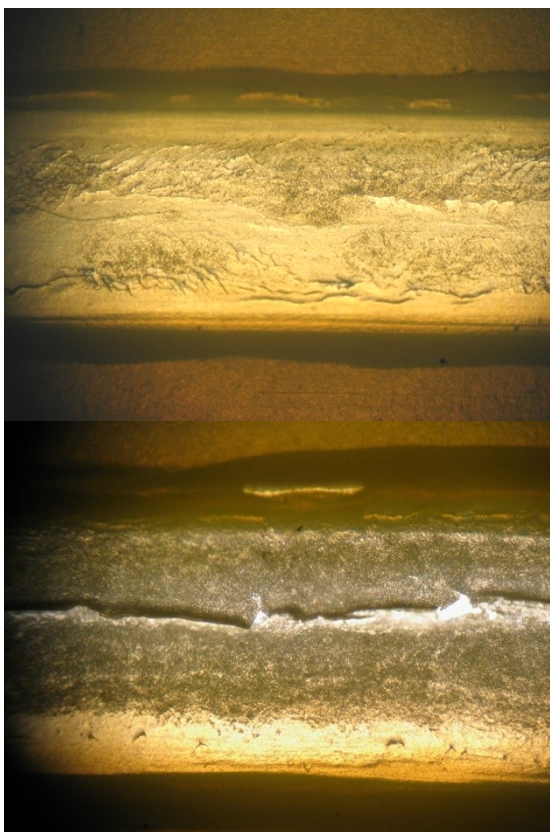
The appearance of the welding seam of polyethylene list made by the ultrasonic welding device with the thyristor regulator
